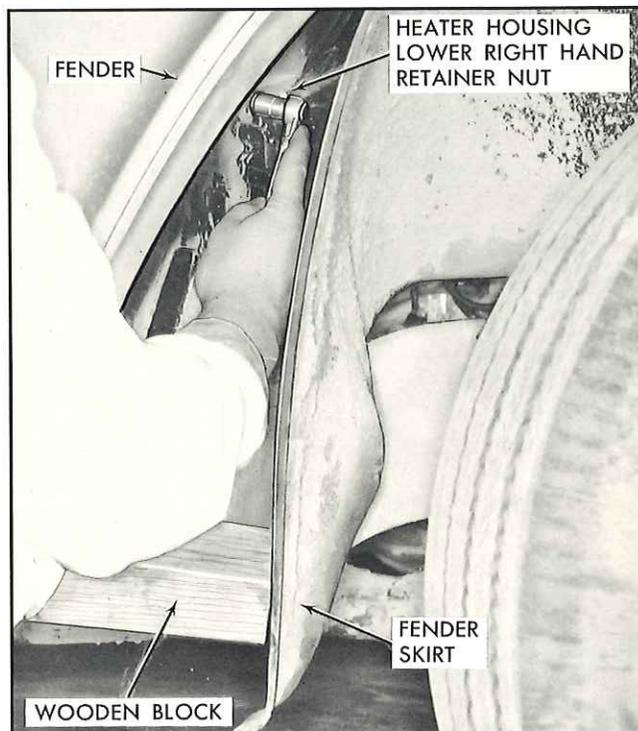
Access To Heater Housing Lower Right Hand Retaining Nut
